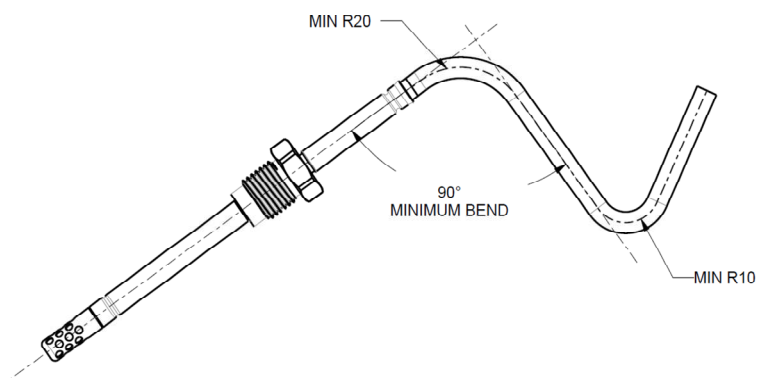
Temperature Sensor Cable Minimum Bend Radius
